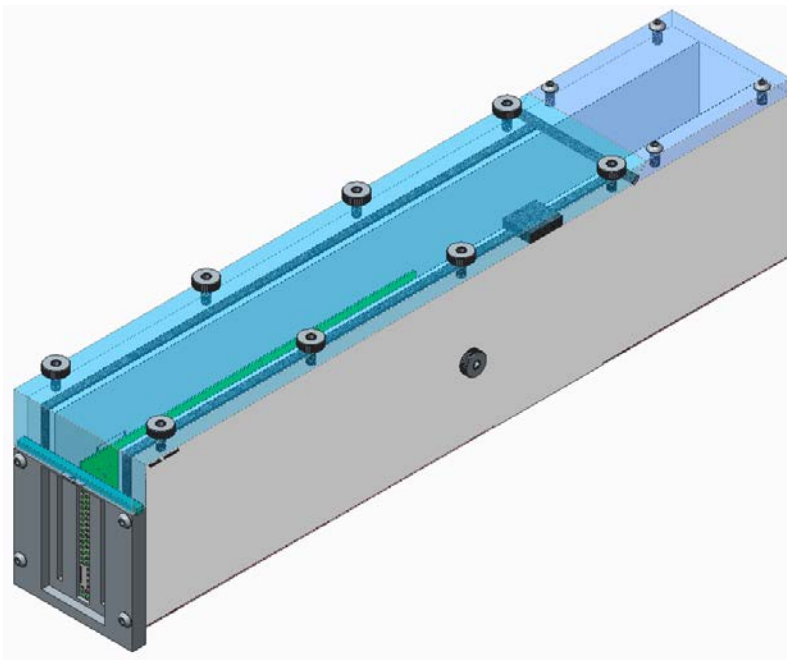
Tester isometric view in MaxTherm and DTherm testing configuration
